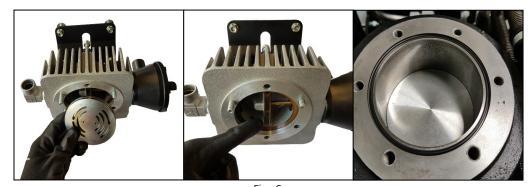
Valve Head Gasket and Inlet / Outlet Valve
